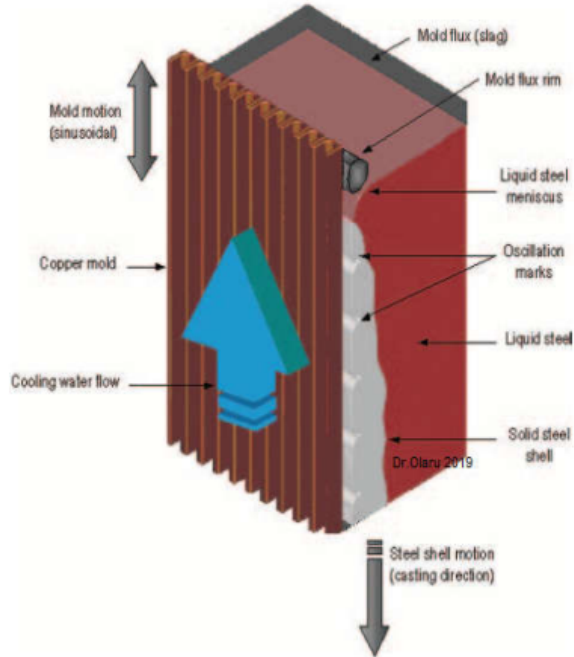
Schematic sketch of liquid steel in a continuous caster mold.
